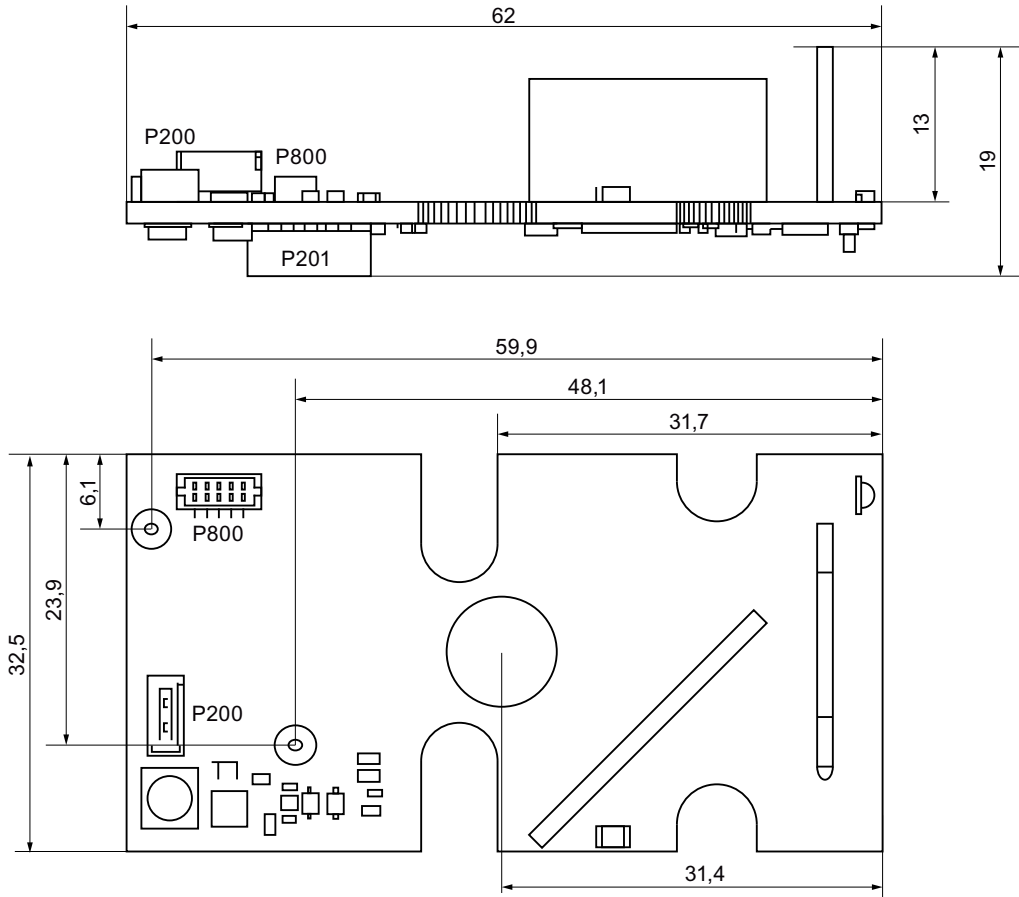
Dimension drawing SIMATIC RTLS PCB OEM AX - All dimensions specified in millimeters
